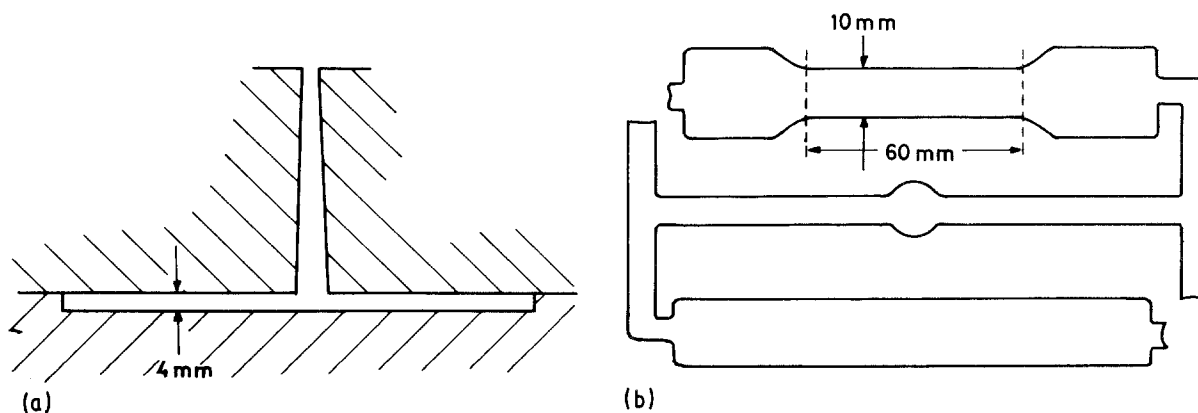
"Normal Mould" cross-section of inlet and mould-halves. (a) View as seen edge on. (b) Projection at 90° to (a). The upper part of the mould was cut and used for the tensile tests.
